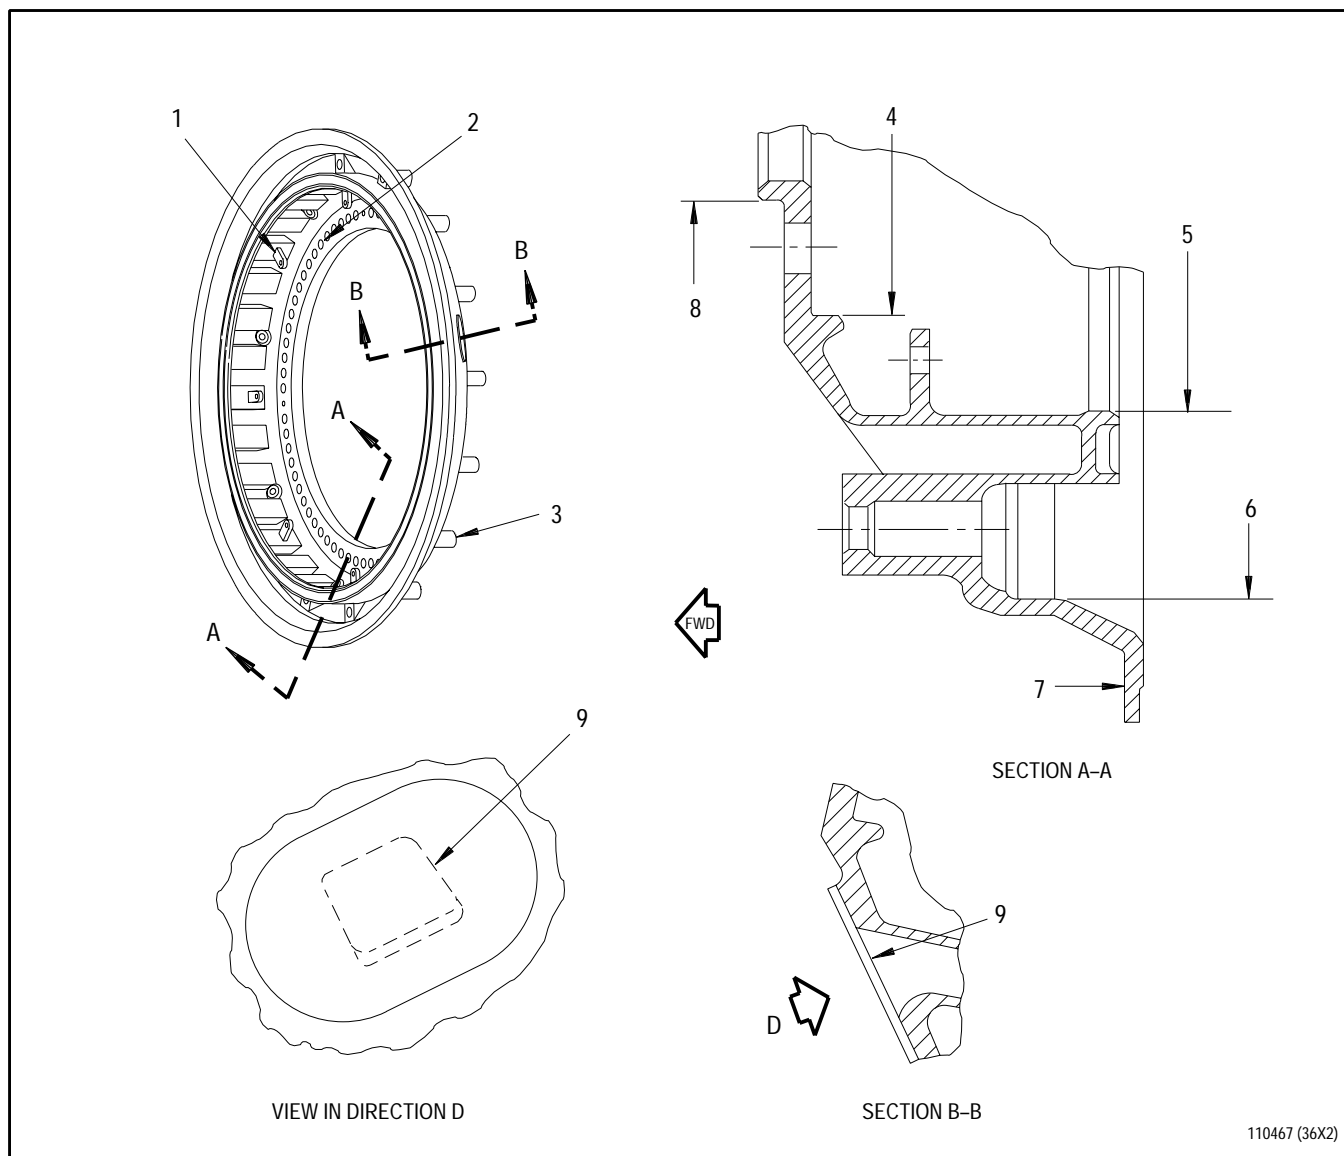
First Stage Turbine Inner Air Sealing Ring - Inspection
